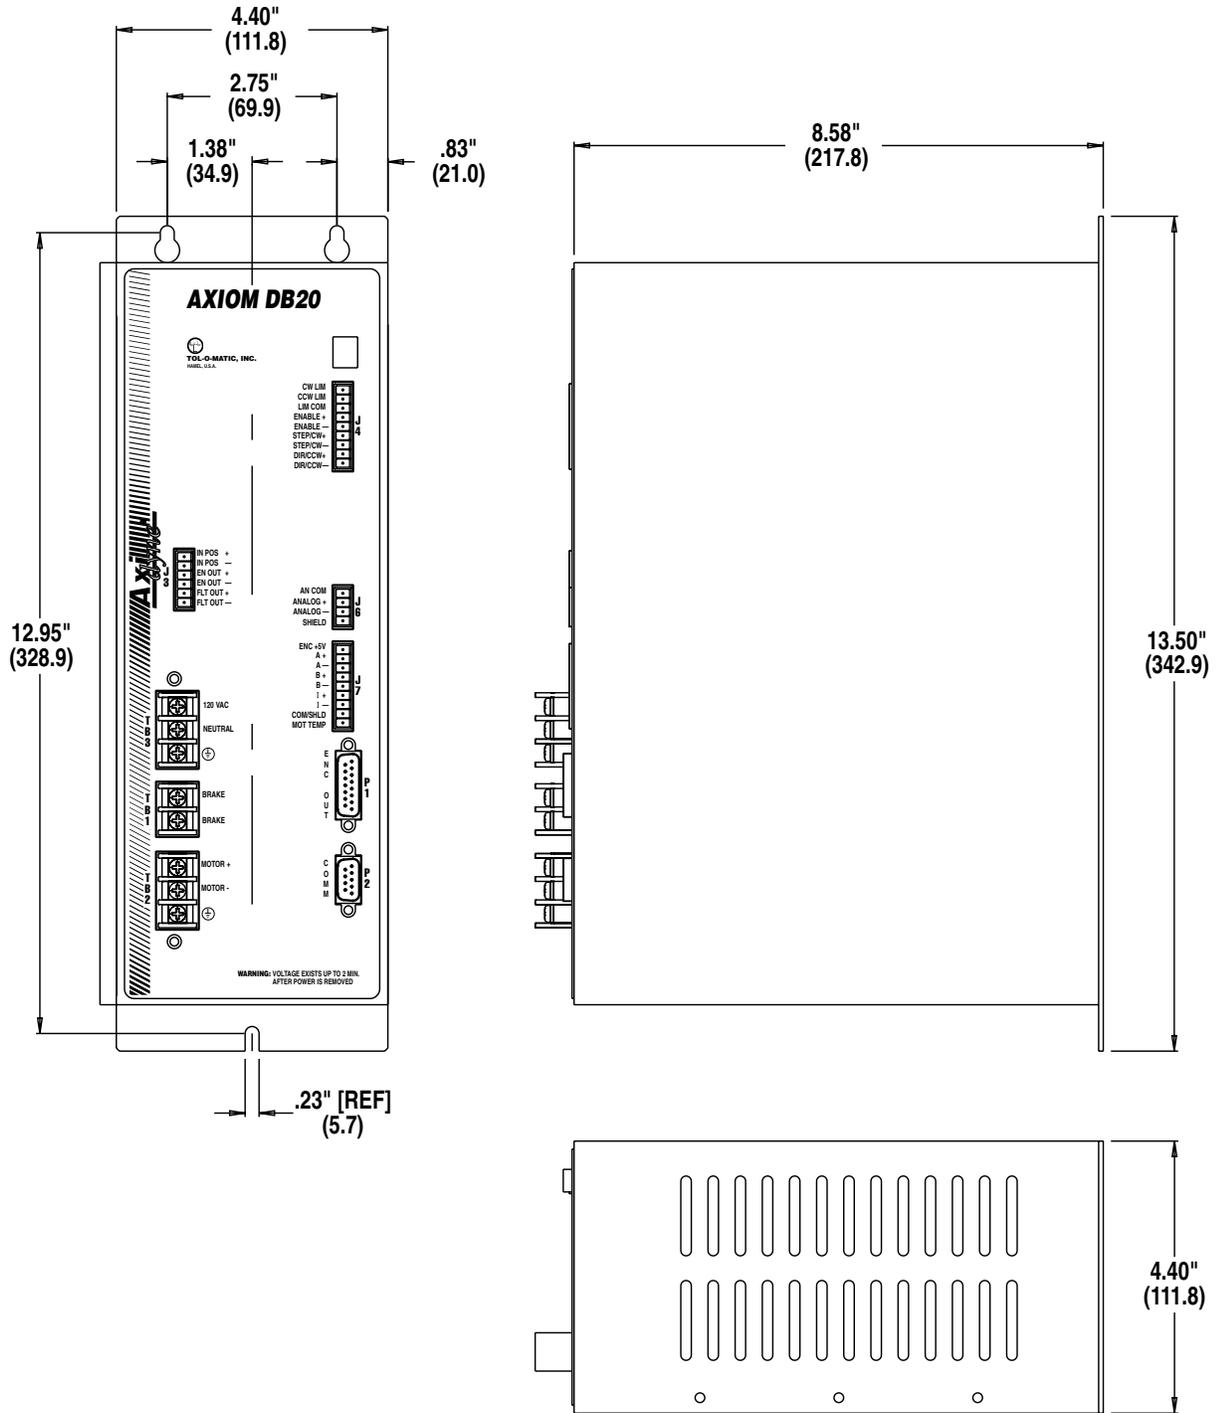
Axiom DB20 Drive Mounting Dimensions
